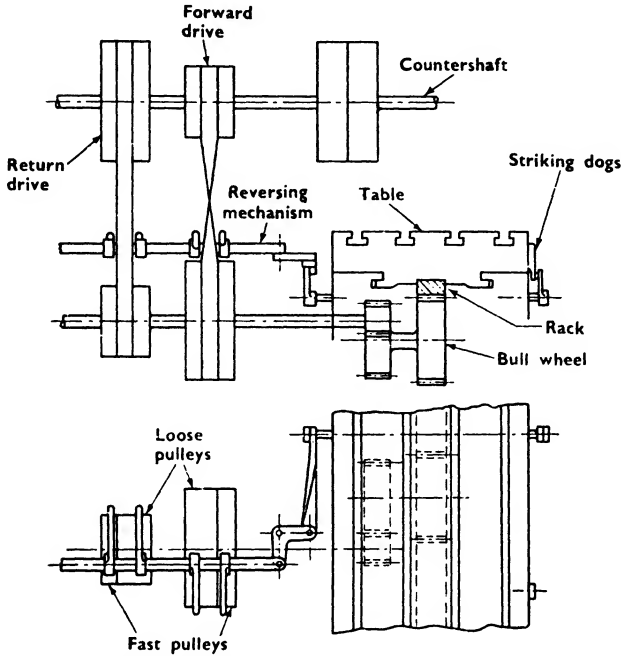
A. REVERSING MECHANISM ON A BELT DRIVEN PLANER
